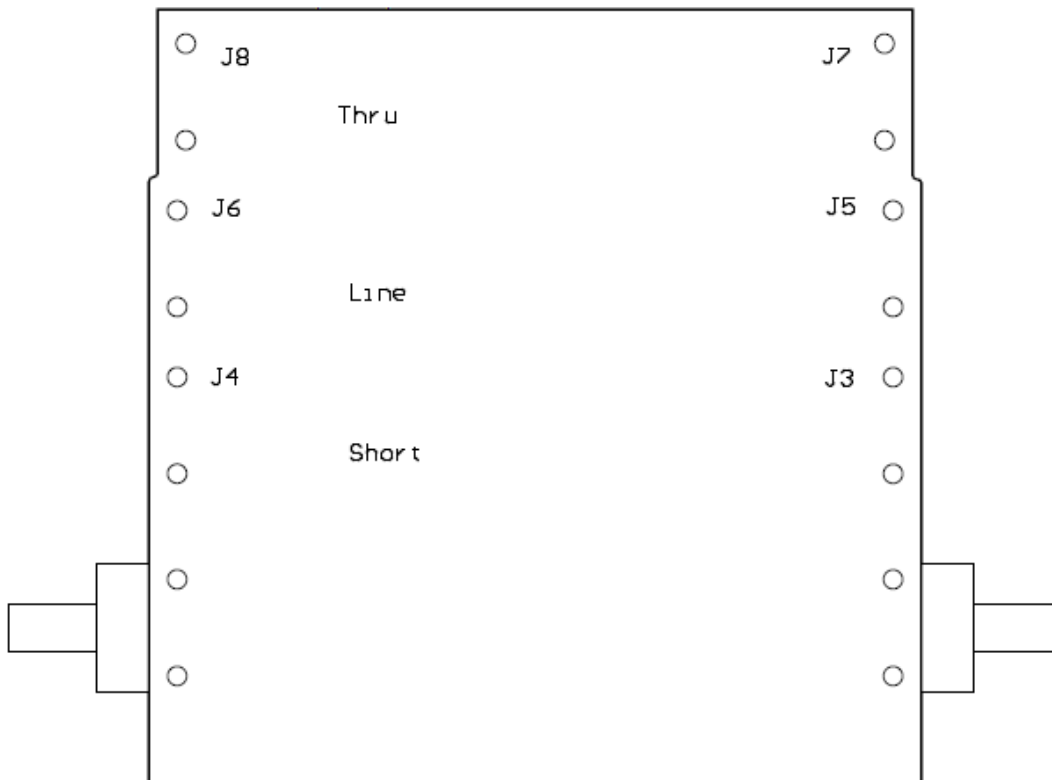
OTFL201/301-EVAL Assembly Drawing (Bottom)
